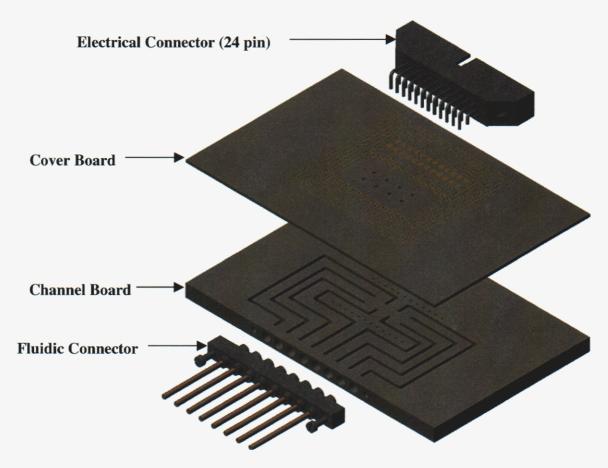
Exploded view of the Fluidic Printed Wiring Board with a standard 24 conductor electrical connector and an 8 channel fluidic connector. The fluidic connector was developed and patented by Lawrence Livermore National Laboratories (Courtesy of Peter Krulevitch and William Benett)
